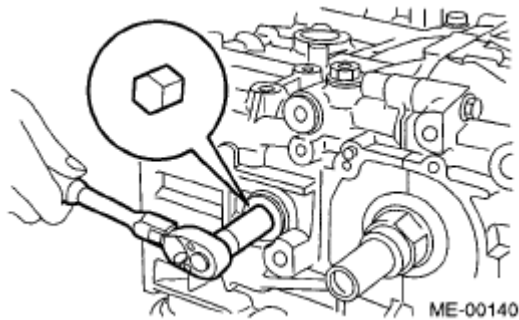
Removing/Installing Service Hole Plugs Using Hexagon Wrench
